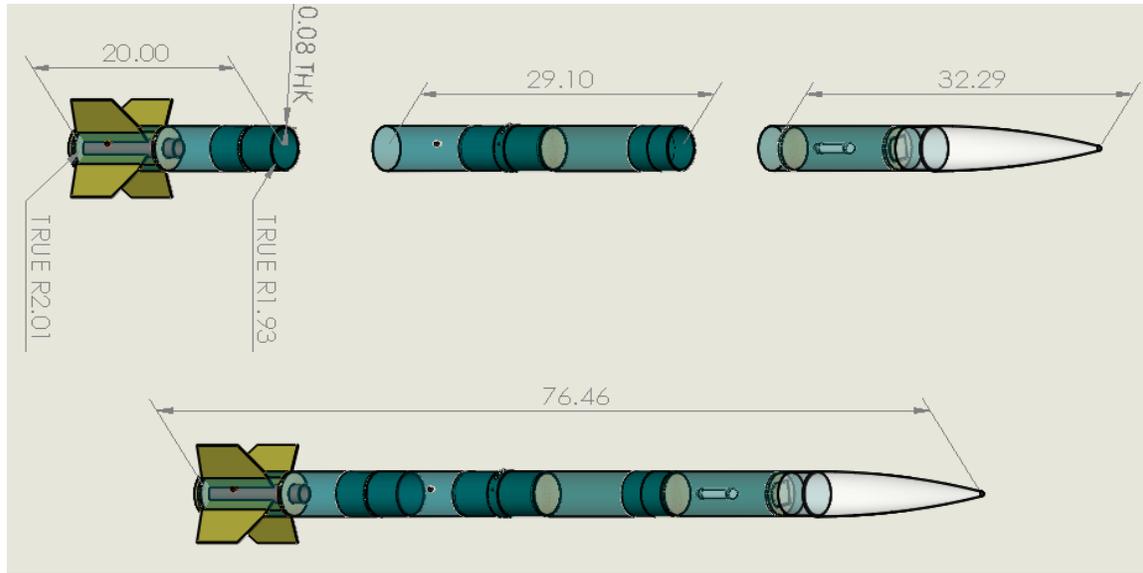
Our team has a lot of experience using SolidWorks to create and model high power rockets. An exploded view of the preliminary rocket design is above with all dimensions in inches.
